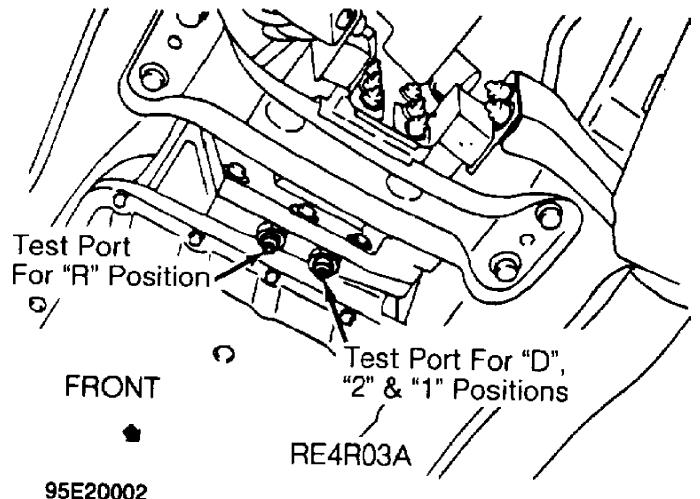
Locating Pressure Test Ports (RE4R03A) Courtesy of Nissan Motor Co., U.S.A.
